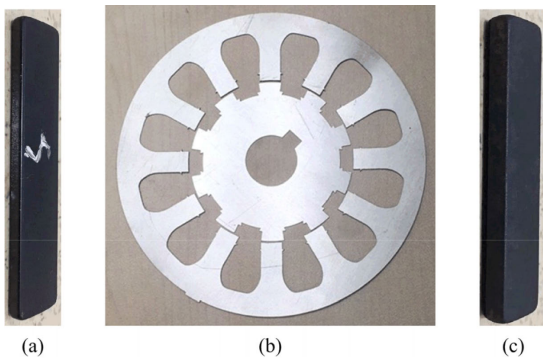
Main parts of 12/10 DPME machine. (a) Stator PM. (b) Silicon steel sheet of stator and rotor. (c) Rotor PM.
